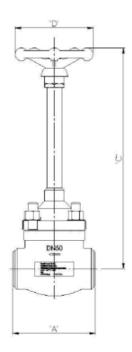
Schematic drawing of a globe valve. (Loomis, 2014)
